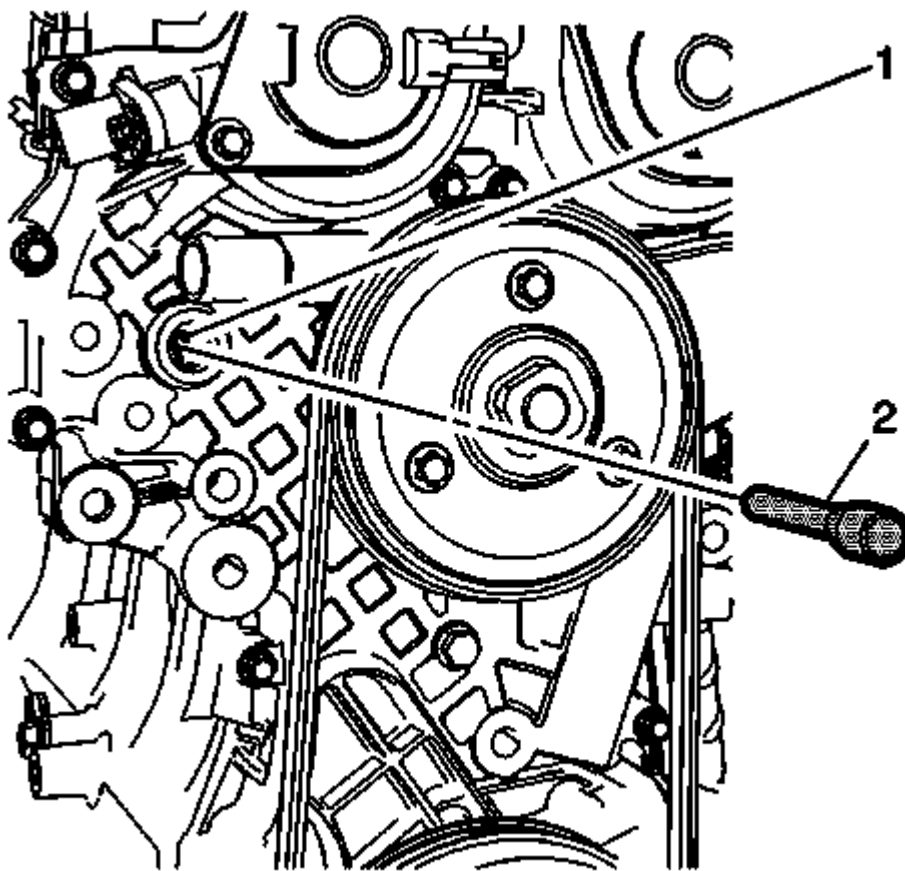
Timing Chain Tensioner Bore And Special Tool
